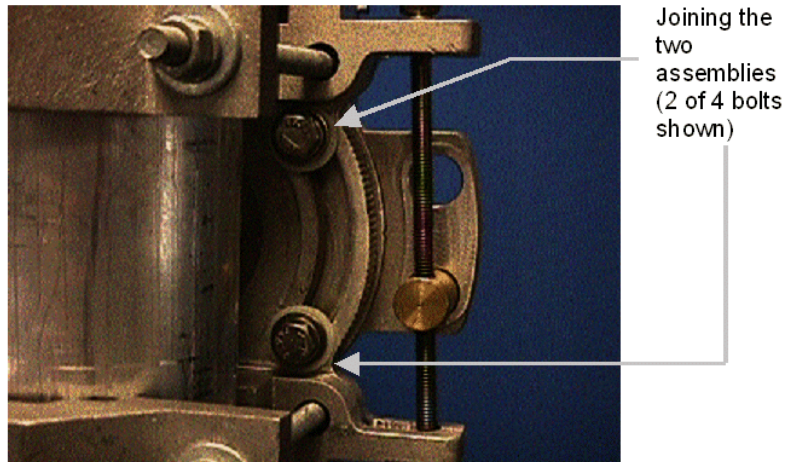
Attaching Elevation Assembly to Pole Mount Assembly
